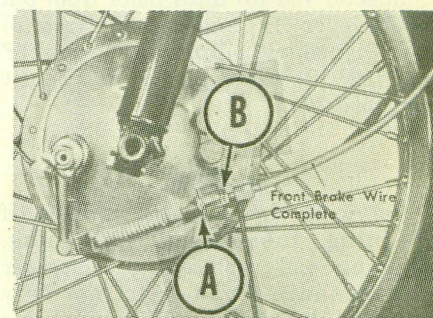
Some front and rear brakes are adjusted at cable guides shown at (B) after locknut (A) is loosened.
